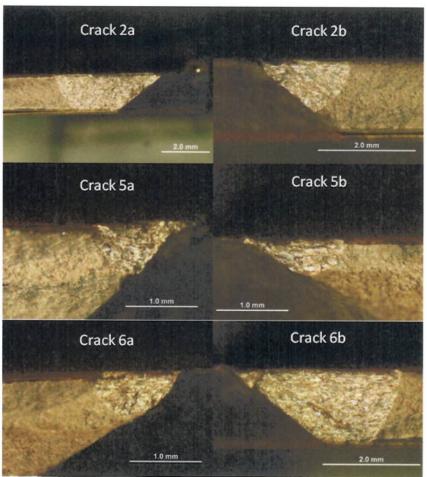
Stereomicrographs of the cracks emanating from fastener holes 2, 5 and 6. The shiny surfaces are the fatigue cracks and the dull surfaces are the fast fracture regions.
